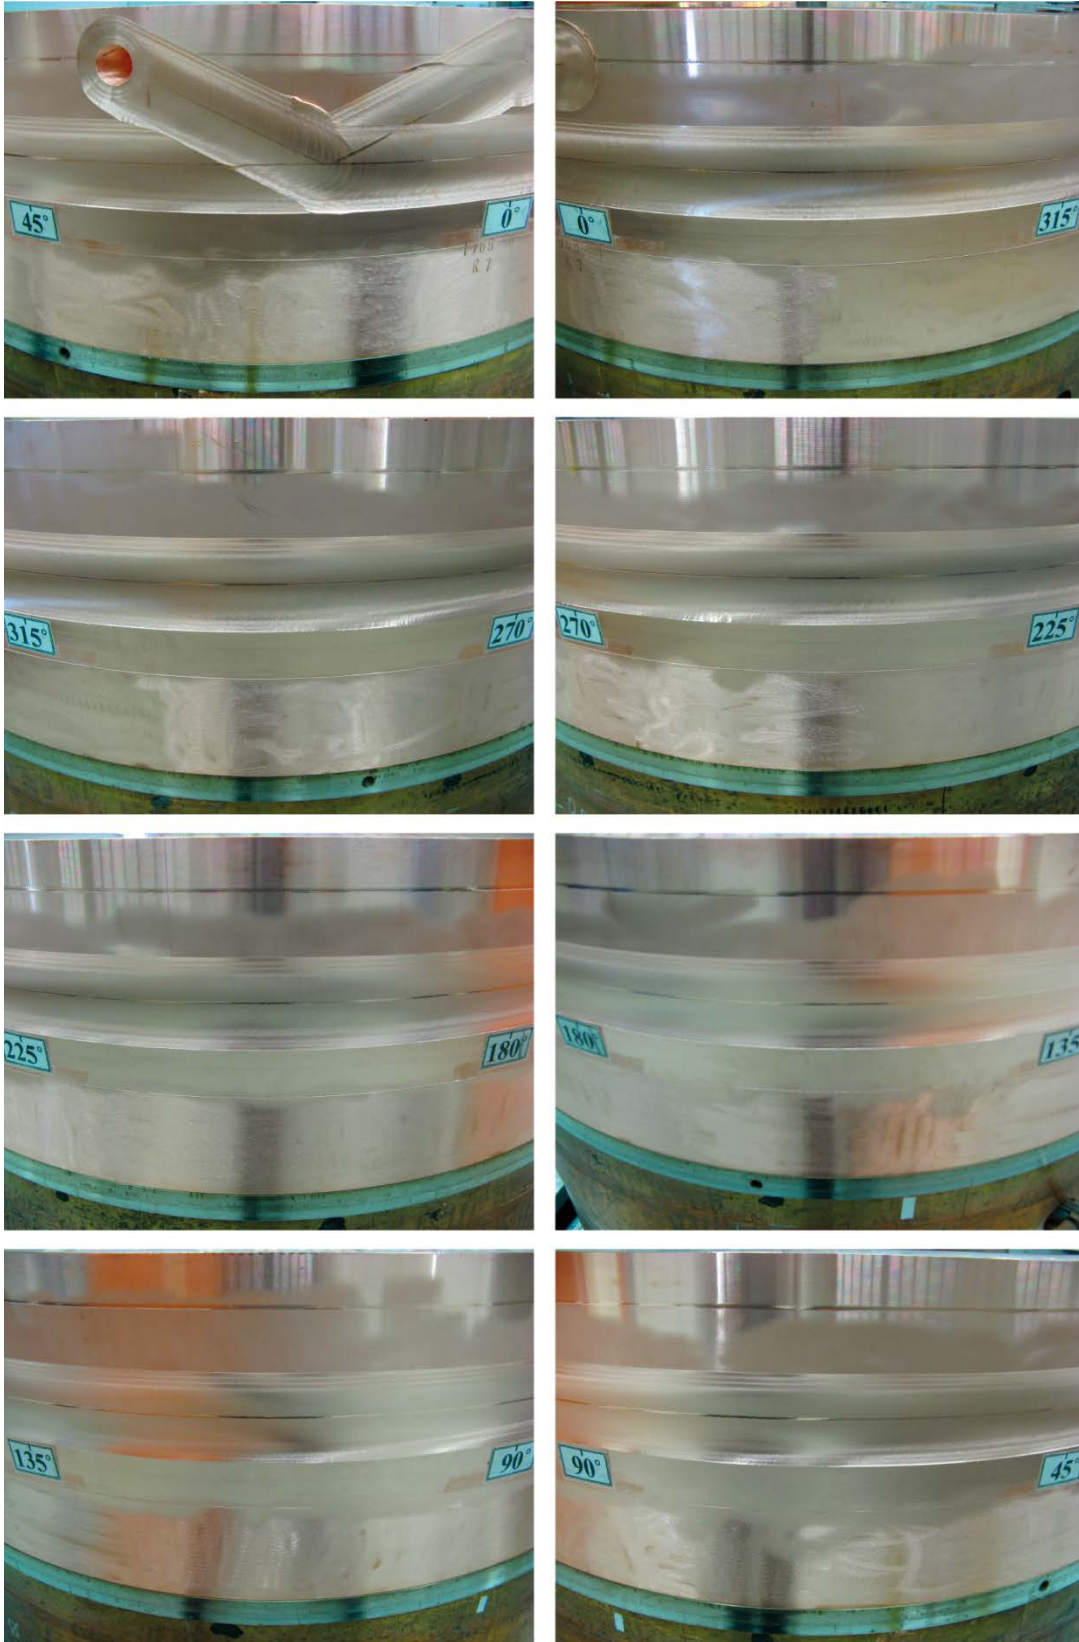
Photographs of weld FSWL110 with external and internal hydrogen-containing shield gas. The shiny lines in the middle of the weld and at the top of the lid are from a ball bearing tool used to measure the position of the welded object after welding. No discolouring could be identified after welding which is interpreted as an oxide thickness below 5 nm, see text for details.
